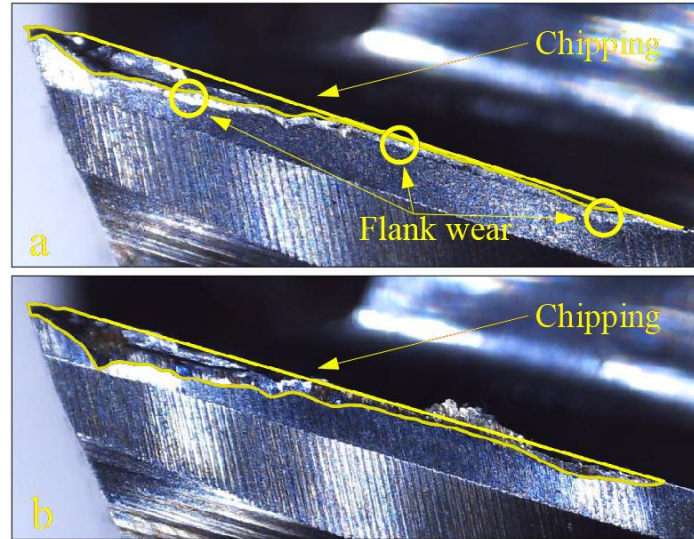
(a) the chipping on the tool #24 before extending (b) the chipping on the tool#24 after extending
